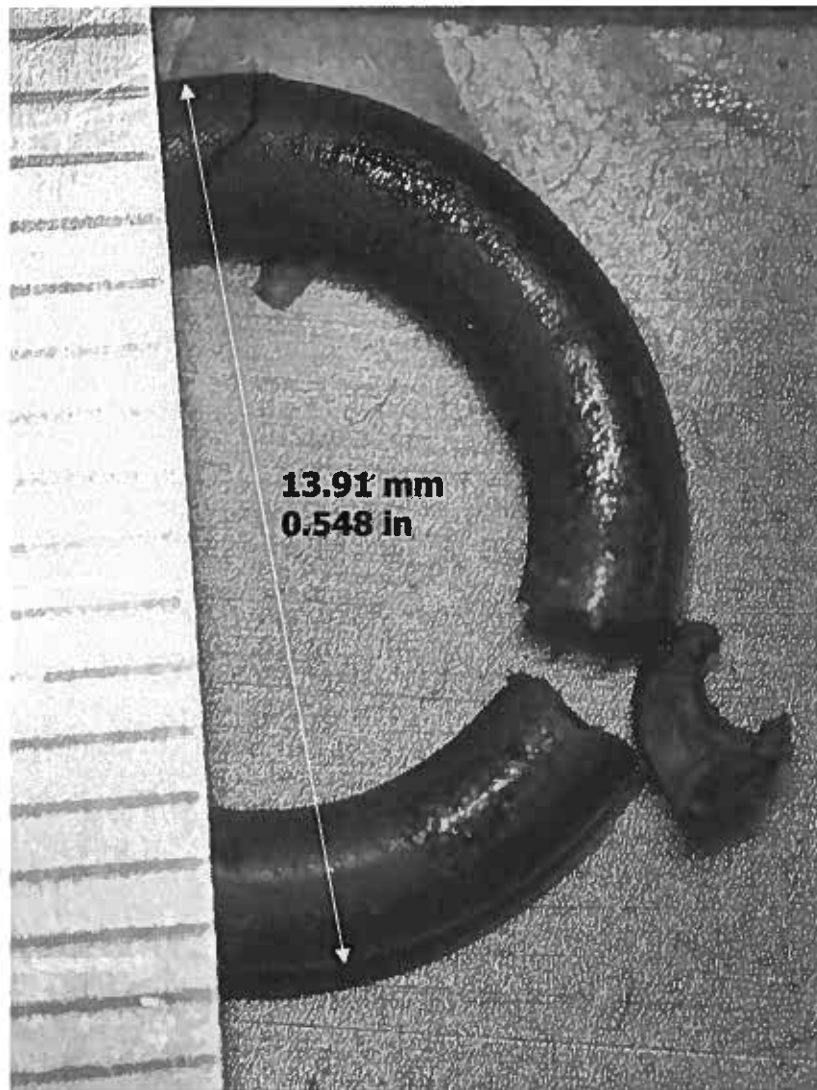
Reassembled O-ring. Estimation of outer diameter.
